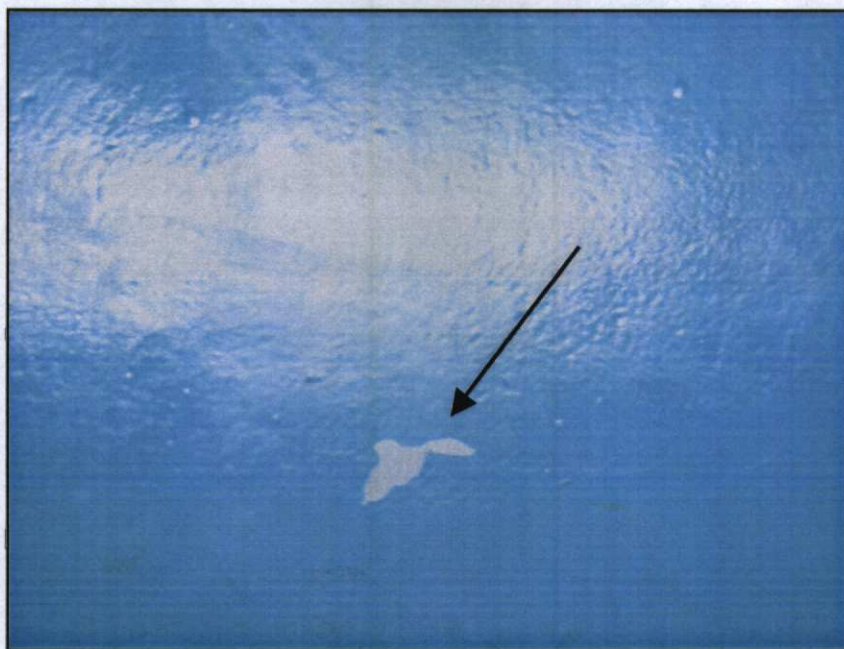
CHIP CAUSED BY INSTALLATION OF METAL RING. THE CHIP DOES NOT EXTEND TO THE METAL, RATHER IS A CLEAN BREAK AT THE INTERFACE BETWEEN THE FIRST AND SECOND COATS. THIS AREA COULD BE EXPANDED BY PROBING WITH THE TIP OF A SHARP KNIFE AND INDICATED THAT THE POOR BOND BETWEEN COATS WAS GENERALIZED IN NATURE.
